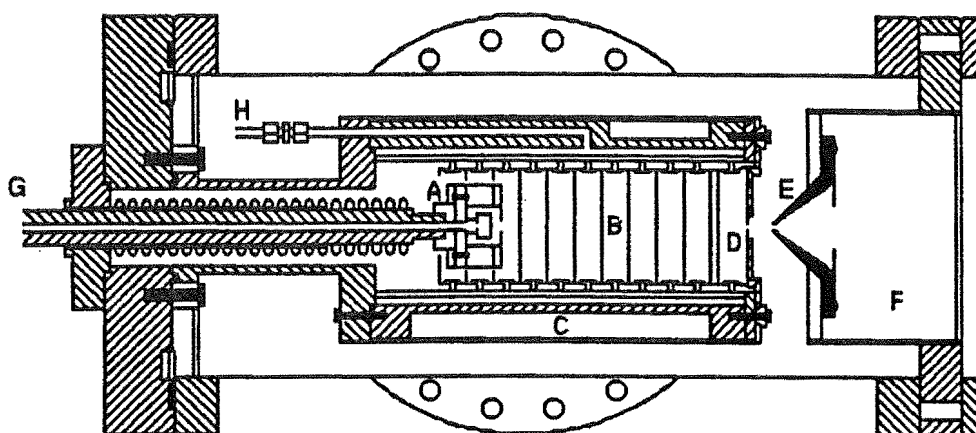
Machine drawing of the drift tube. A, movable ion source supported on a threaded rod; B, gold plated drift rings; C, drift tube vacuum envelope; D, gold plated ion exit plate; E, skimmer placed before the quadrupole assembly; F, mass spectrometer chamber; G, linear drive shaft for the ion source; and H, one of two diametrically opposite sample lines used for gas admission to the drift tube and drift tube pressure measurement.
